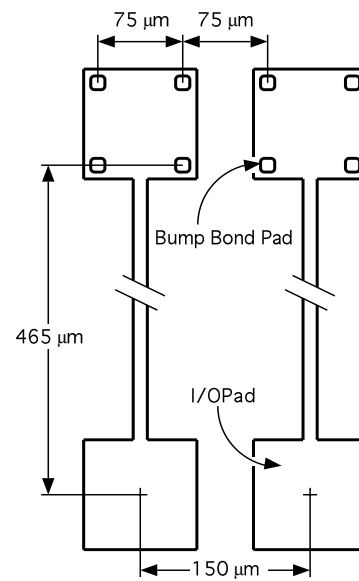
Details of layout of combined wire-bond and bump-bond I/O pads.
